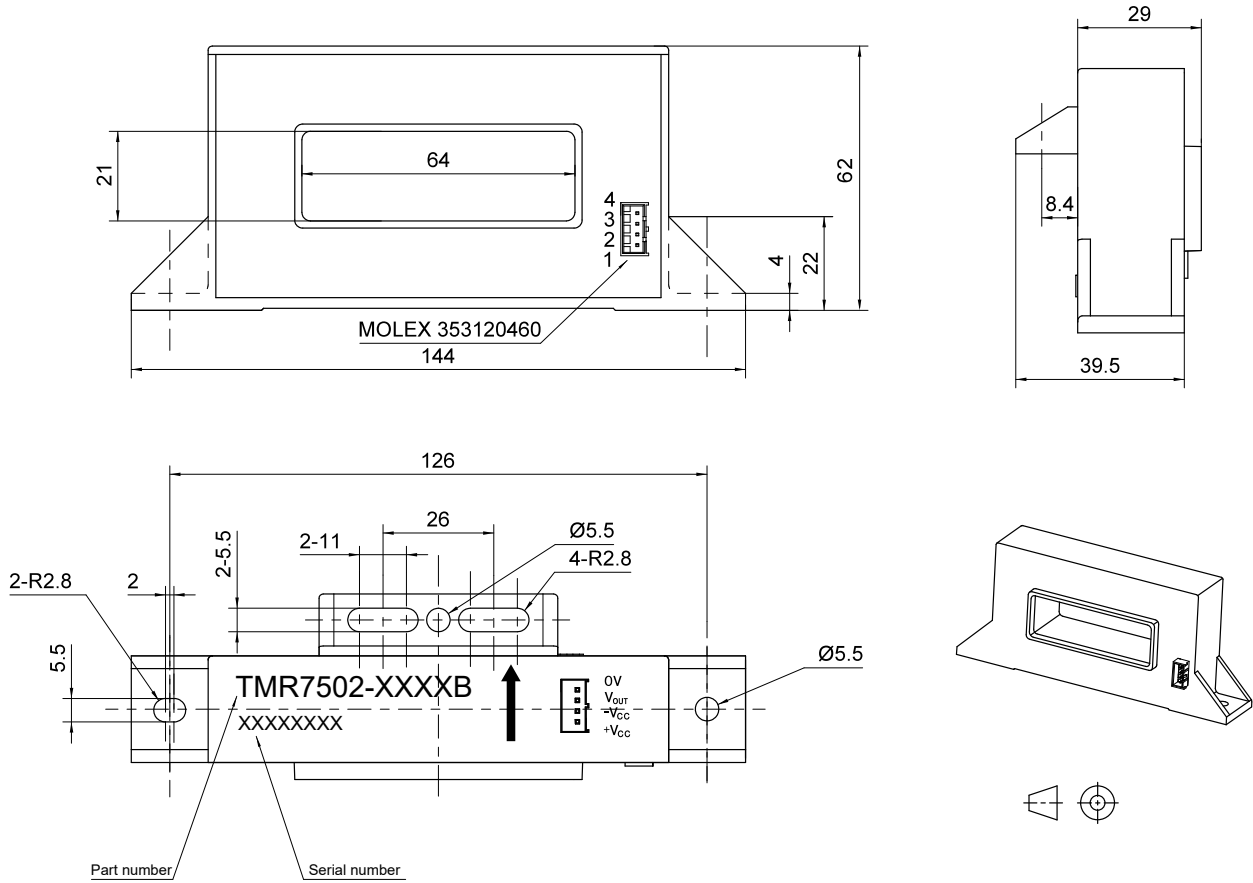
Dimension (unit: mm, tolerances for unmarked scales ± 1 mm)
